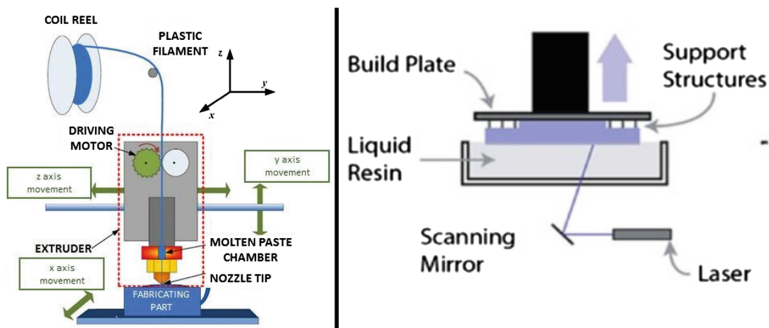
FDM 3D printer (left) and SLA 3D printer (right) [25, 26].
